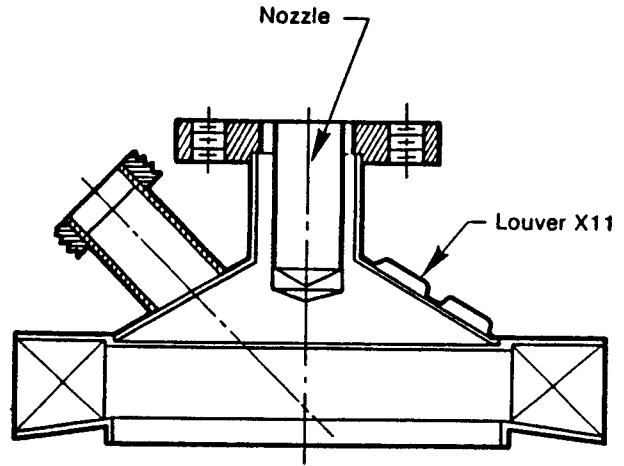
EGR Combustor Turbulator, Modified Aerodynamic Design
